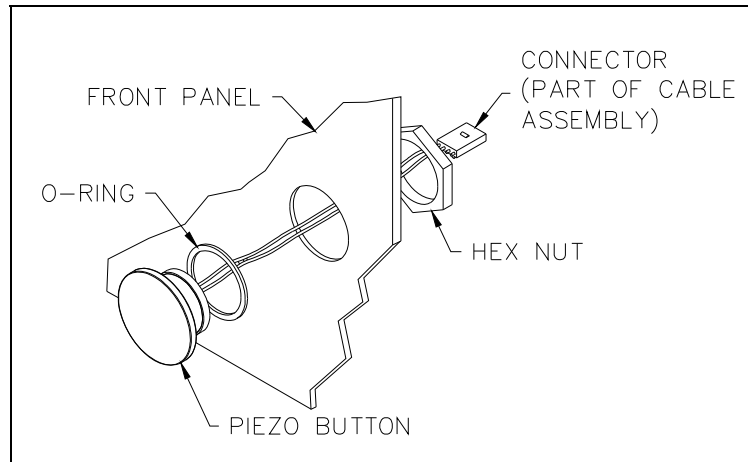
Piezo Push-Button Switch Assembly, Exploded View
